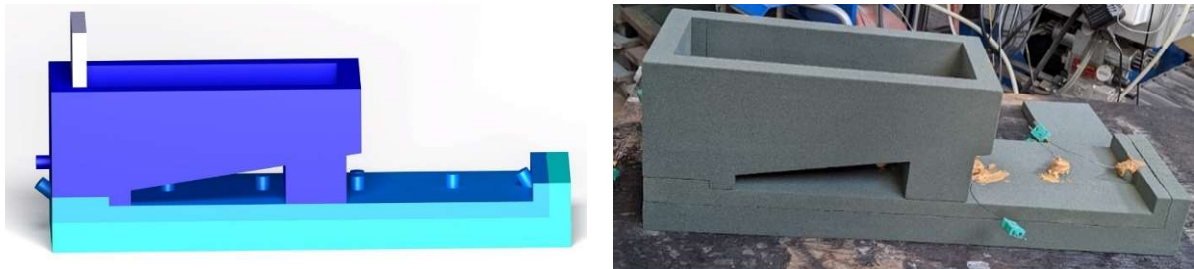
Geometry of mold a) Left: designing by CATIA b) Right: 3D Printed resin - bonded sand mold
